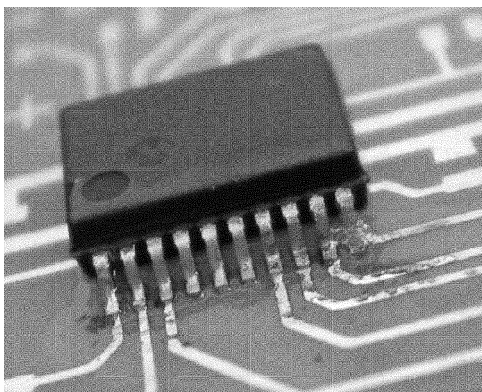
After removing the solder, solder bridges (one can be seen on the right) may sometimes remain, requiring another removal pass.
